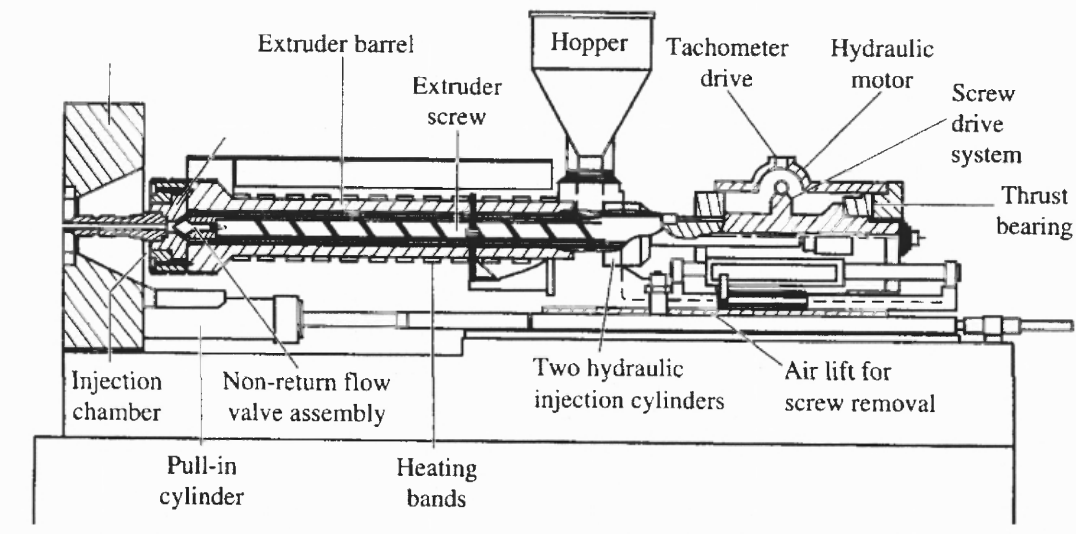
A schematic drawing of an injection molding machine (Johannaber, 1985)
